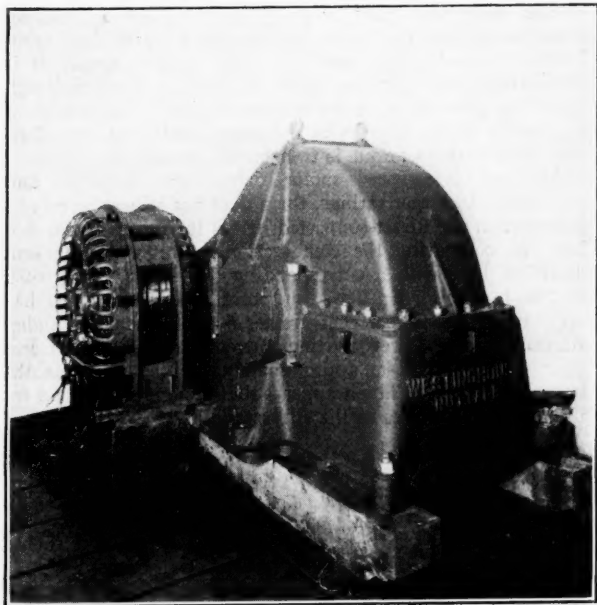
Combination Gear Unit and Synchronous Motor with Overhung Rotor
